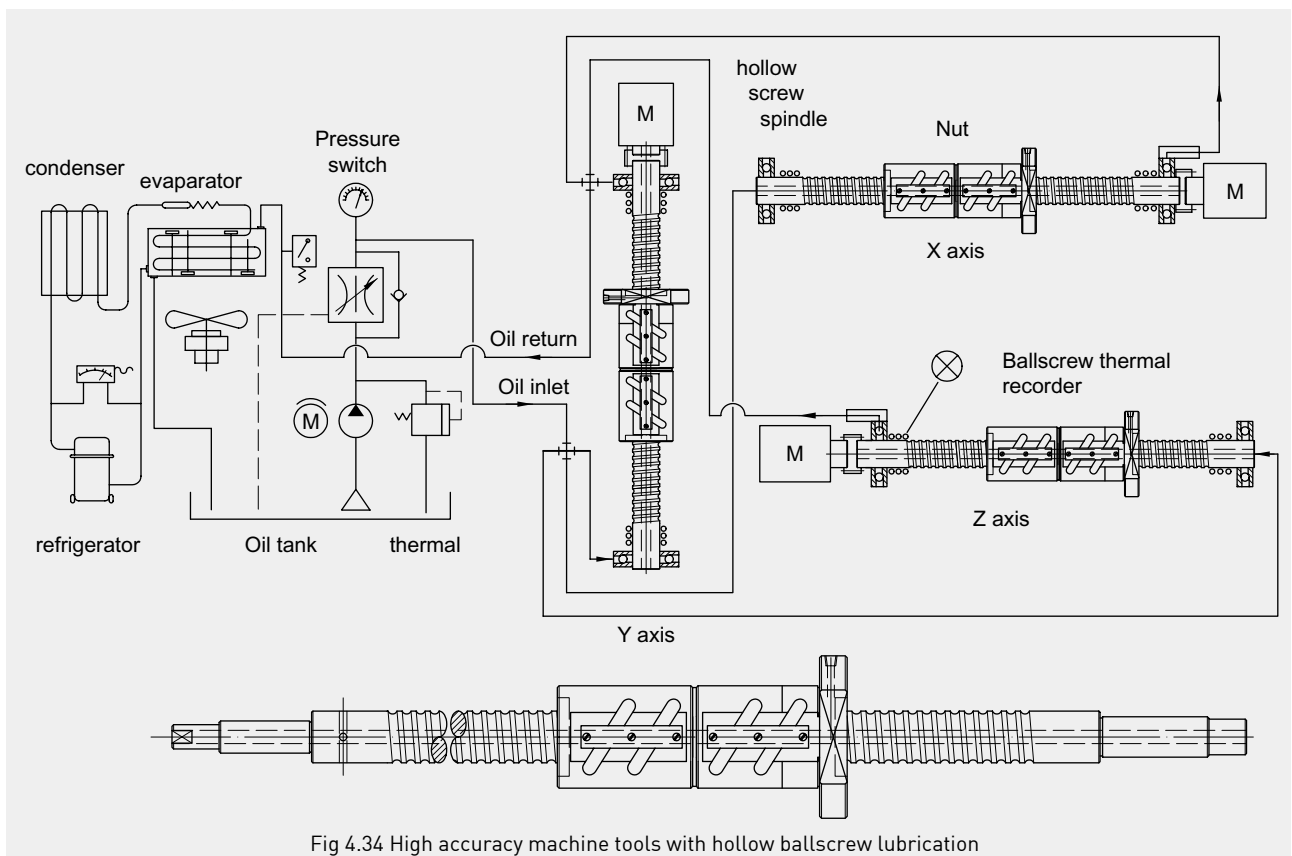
High accuracy machine tools with hollow ballscrew lubrication
